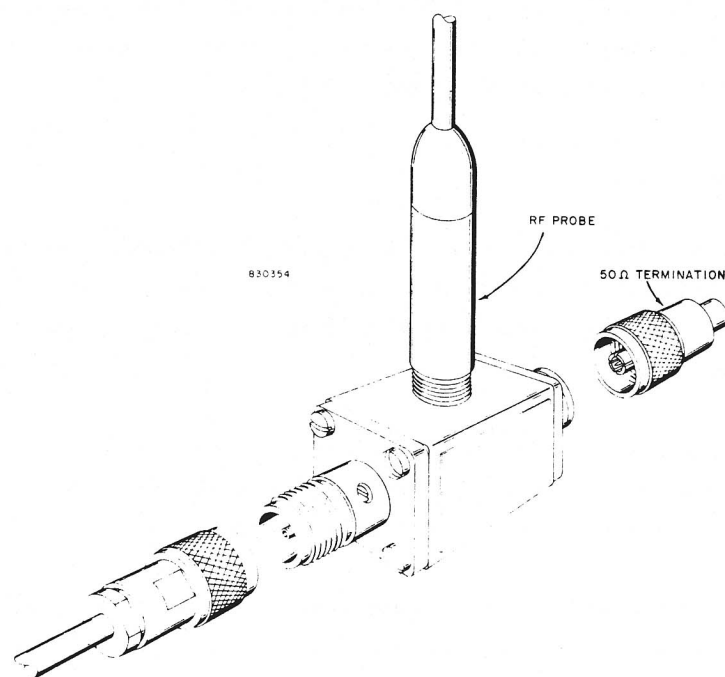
Assembly of Model 91-14A Type N Tee Adapter
